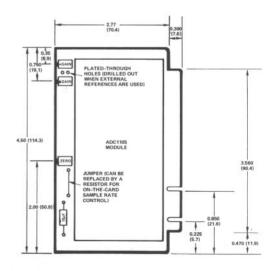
AC1547 Mounting Board Outline Dimensions; Dimensions Shown in Inches and (mm).
